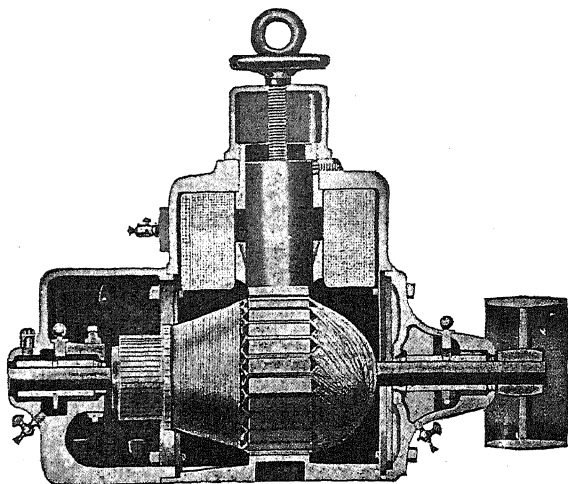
Stow adjustable speed motor; sectional view showing mechanism for adjusting the speed by shifting the pole pieces.
